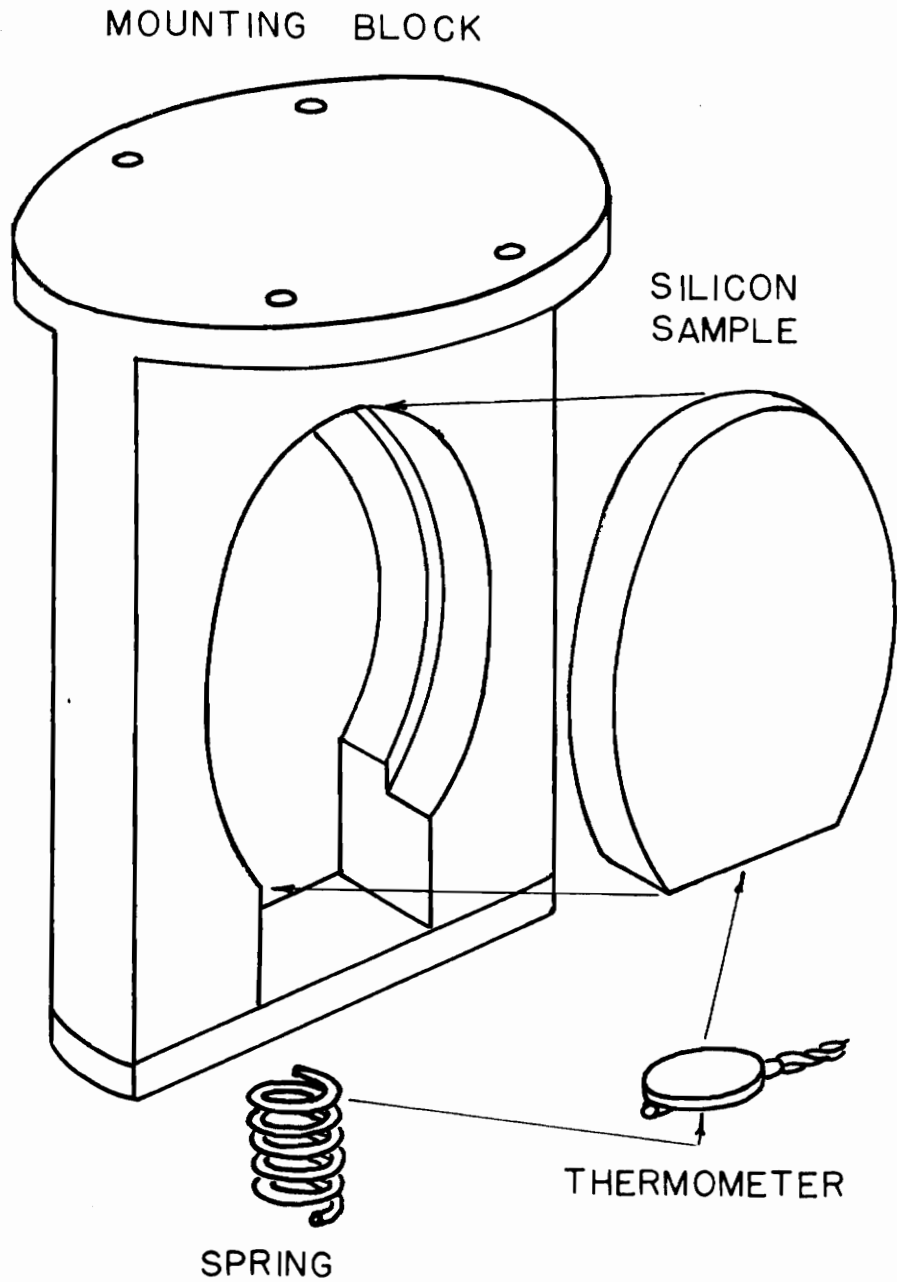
Assembly of Sample, Resistance Thermometer, and Mounting Block.
